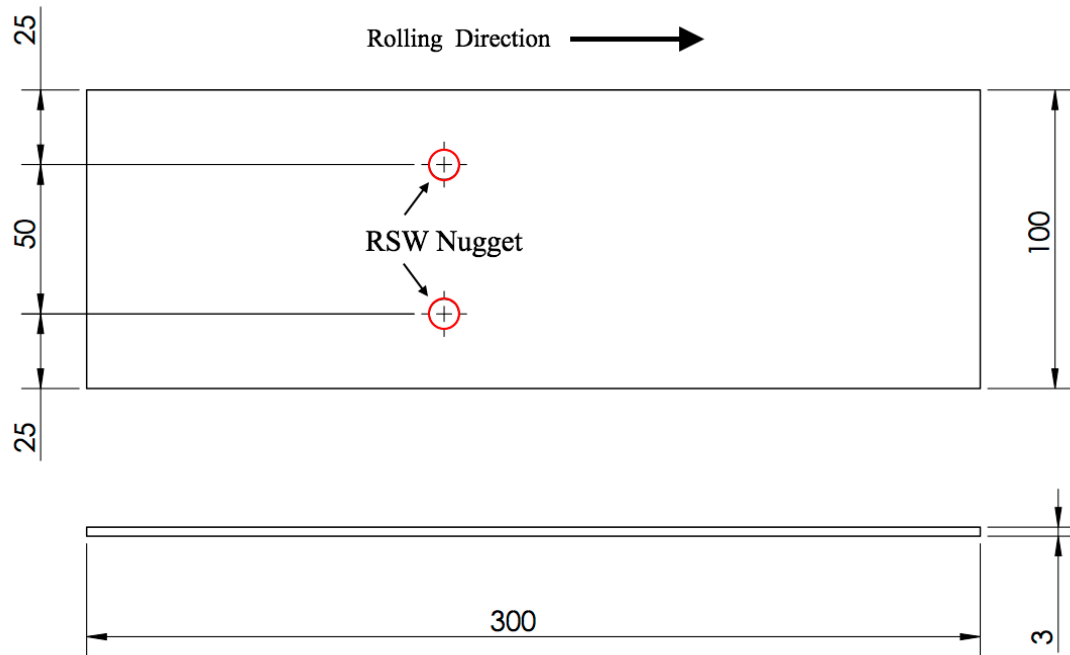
RSW nugget locations in the middle sheet of the 2-3-2 sheet stackup. All units in mm.
